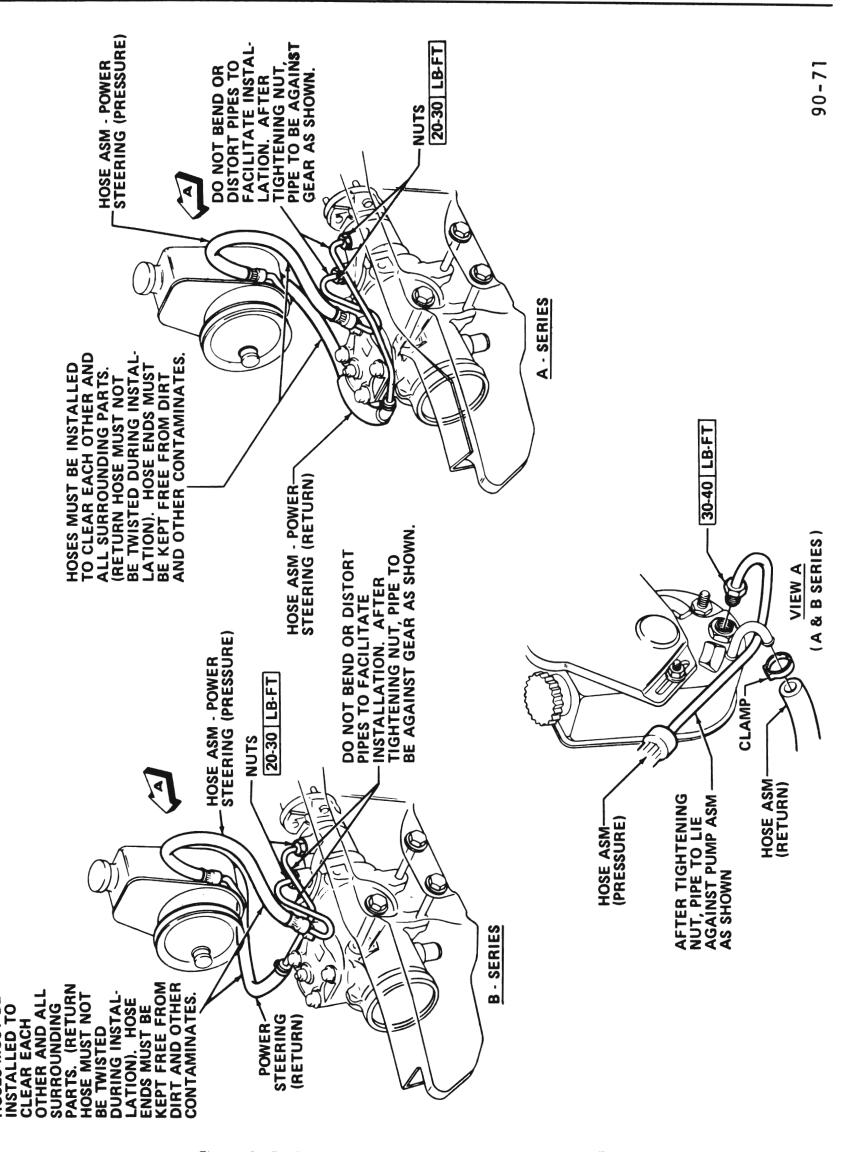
Power Steering Hose Routing A.I.R. - 350 Engine
